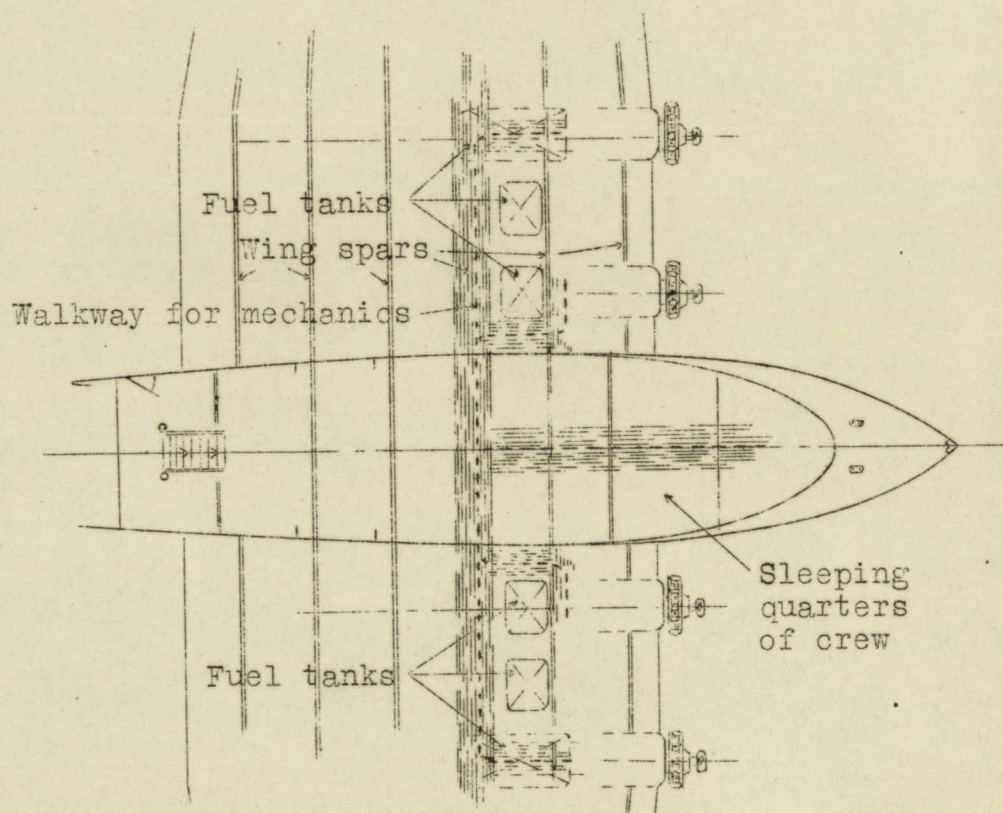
Sectional plan of Richard-Penhoët seaplane.
